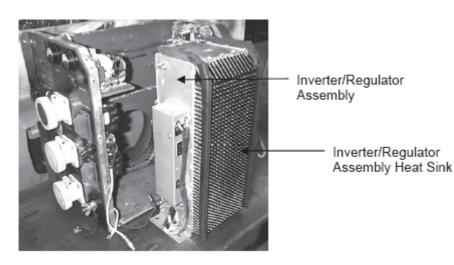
Inverter/regulator assembly - removed from the electronics frame
